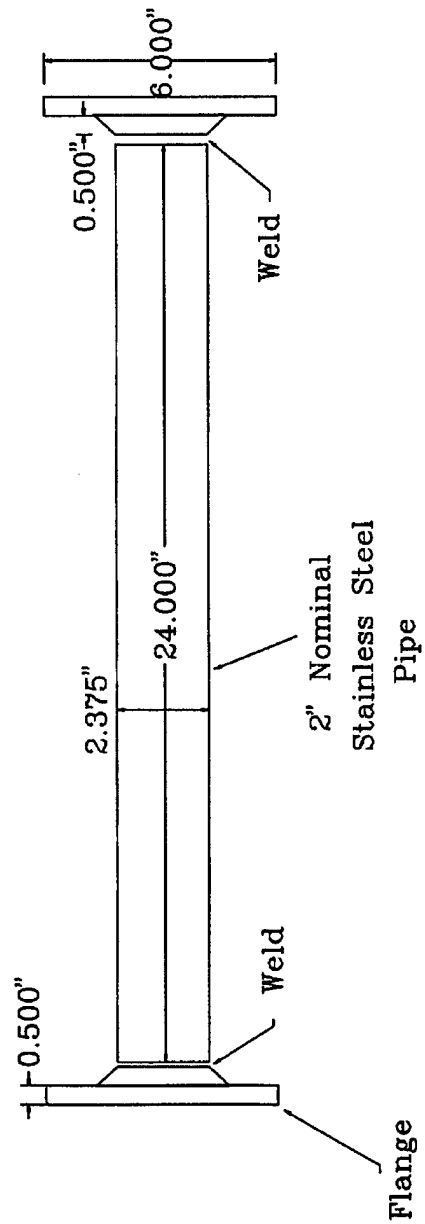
Stainless Steel Tube Portion of Reactor - Side View
